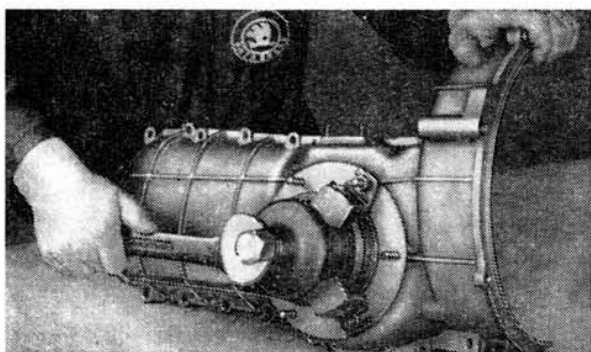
/2 - Pressing Out the Cup of the Tapered Roller Bearing Using MP 5-107 and MP 5-108 Jigs
